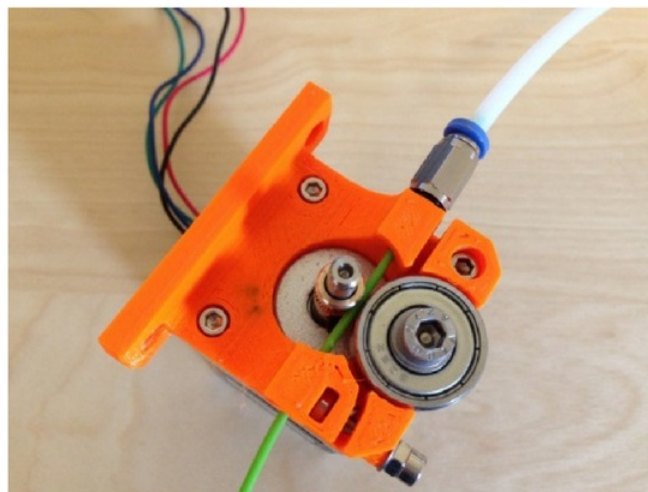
A conventional Bowden extruder motor design, with teflon tube [38]
